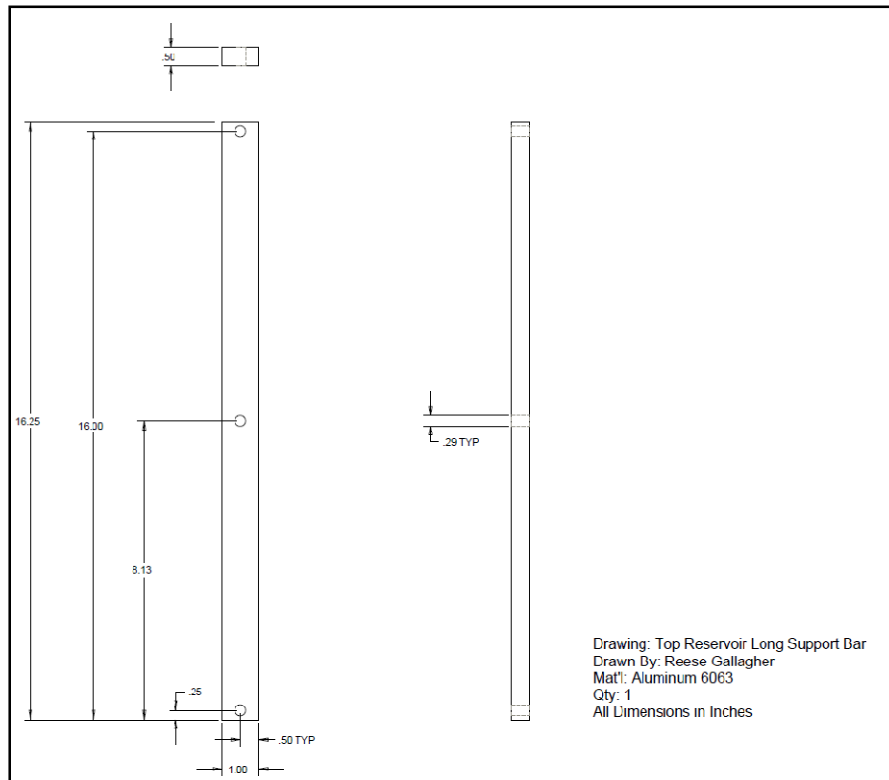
Top Reservoir Long Support Bar Dimensional Drawing
